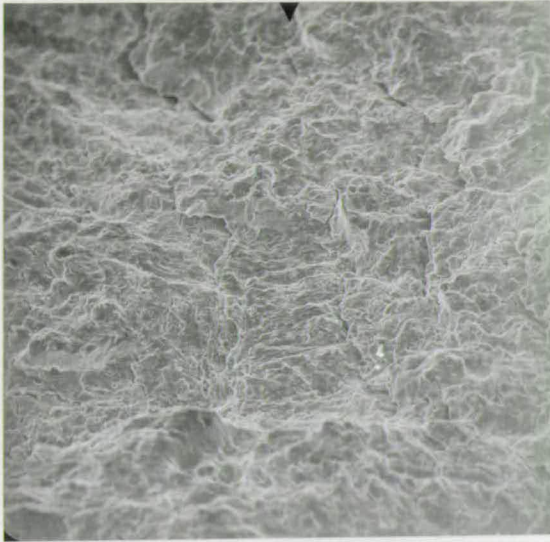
Fracture surfaces resulting from 8 level block loading
